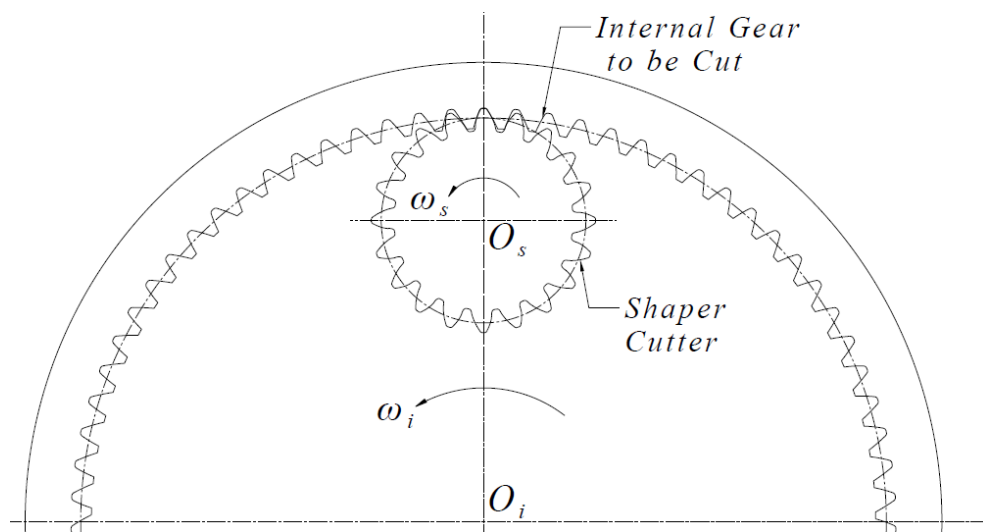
Basic visualization of internal spur gear generation by a shaper cutter
